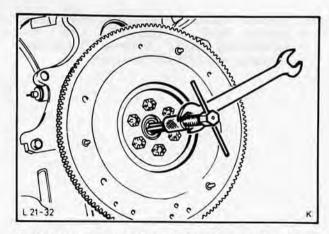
Remove crankshaft needle bearing, using Special Tool 21–036
